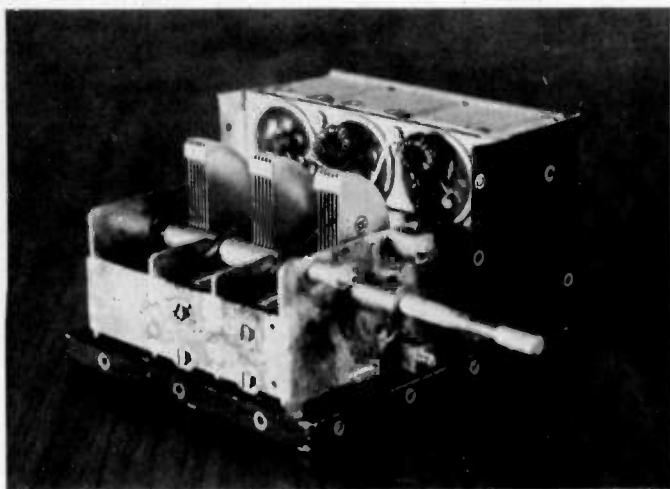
Photo C. Multi-section filter using R-11a parts (no dial assembly), variable capacitor shield removed to show details. Note position of bottom coupling toroid coils.
